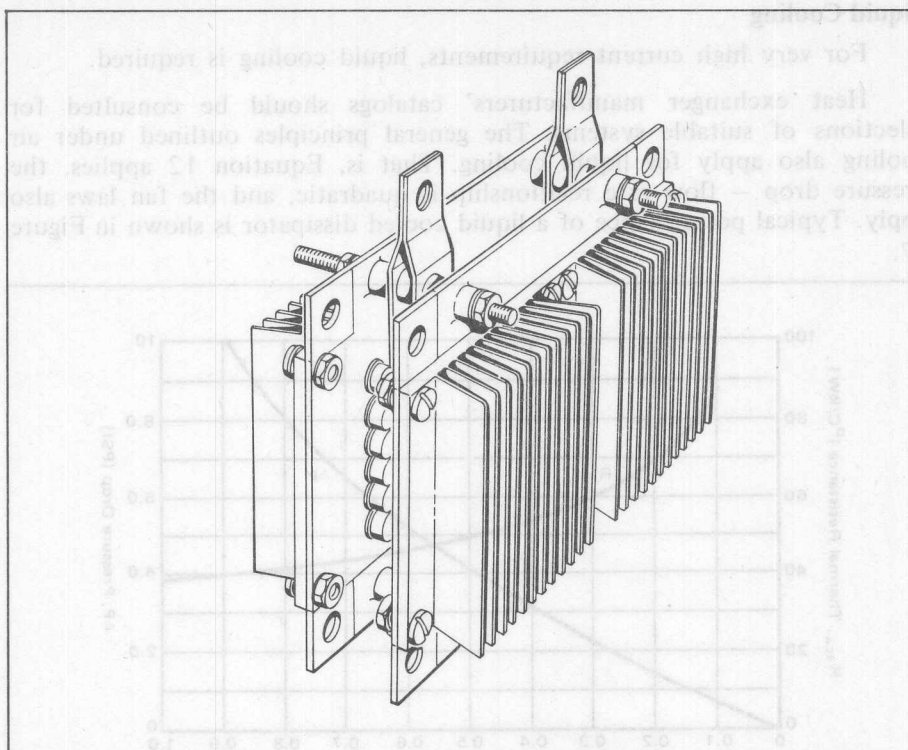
A 650 Ampere Rectifier for 3-Phase Service Having Integral Heat Sink
